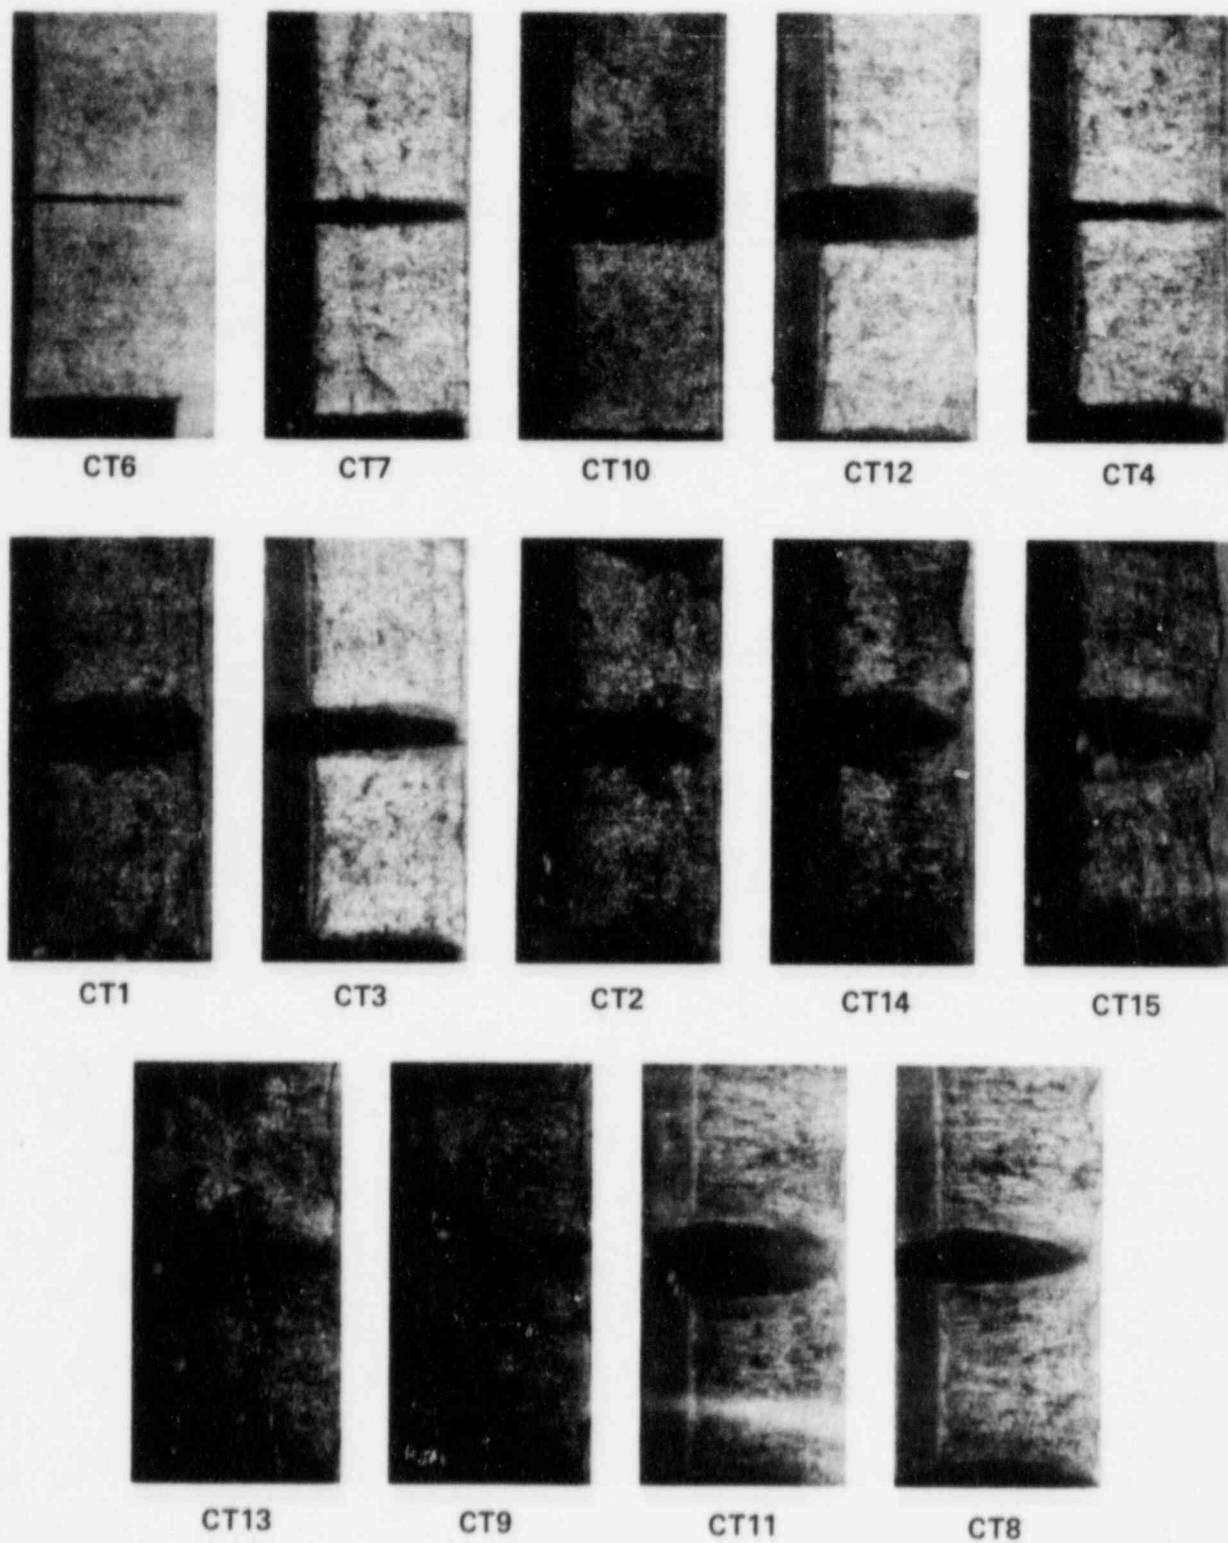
Charpy Impact Specimen Fracture Surfaces for V.C. Summer Unit 1 Reactor Pressure Vessel Intermediate Shell Plate A9154-1 (Transverse Orientation)
